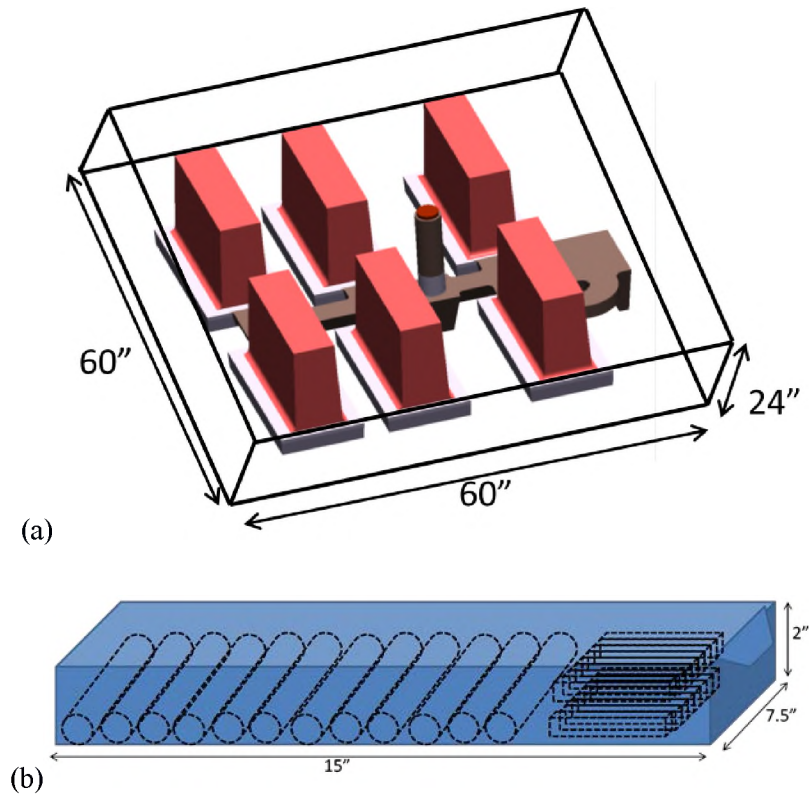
Schematic drawing of cast Eglin steel showing (a) mold configuration and (b) approximate specimen location within the individual cast weld plate.
